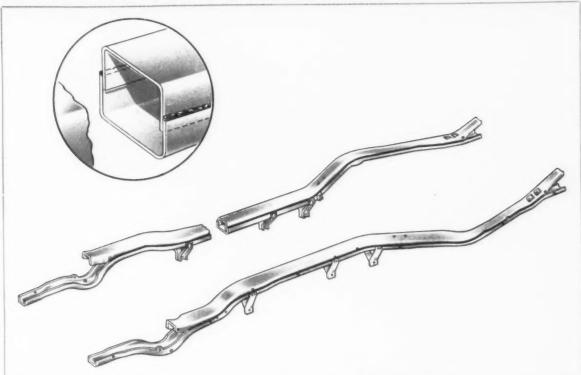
Right and left side rail assemblies welded to form a box-type structure. The 252 in. of weld on each assembly is done in about 21 sec.
